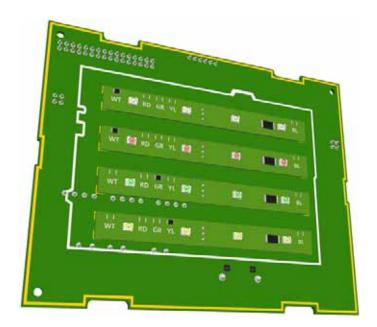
NIRC room controller PCB with 4 LED lamp boards
